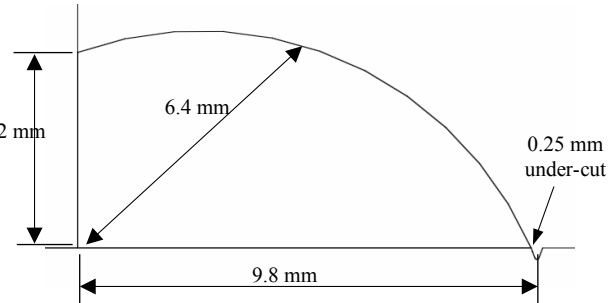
Case 6 weld dimensions used in finite element model for nominal fillet weld 6.4 mm.
